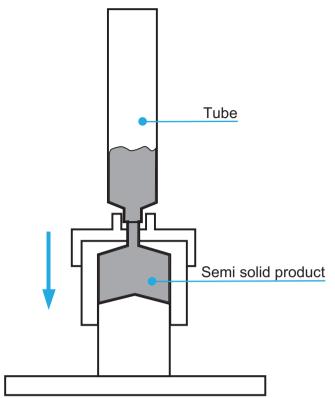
Schematic drawing of a piston-cylinder apparatus
